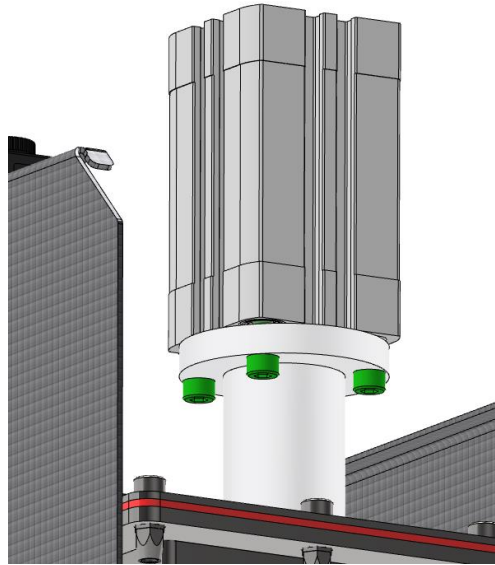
Dismantling the pneumatic cylinder (similar to picture)
